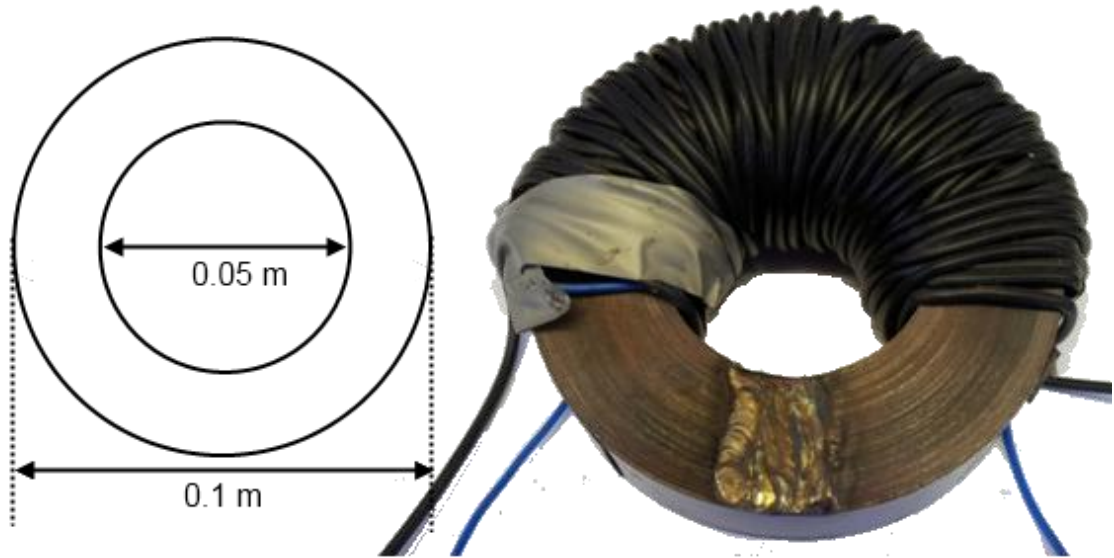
Toroidal core made of GO used for burrs application. Welding seen in the figure used as one of the burr application methods. Outer diameter 0.1 m, inner diameter 0.05 m, height 0.025 m, 100 primary windings (black), 10 secondary windings (blue).
